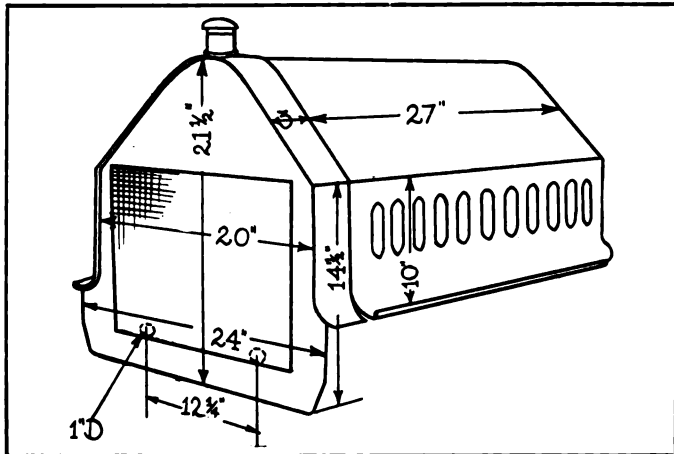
Dimensions to Be Observed in Fitting the Radiator and Hood.
